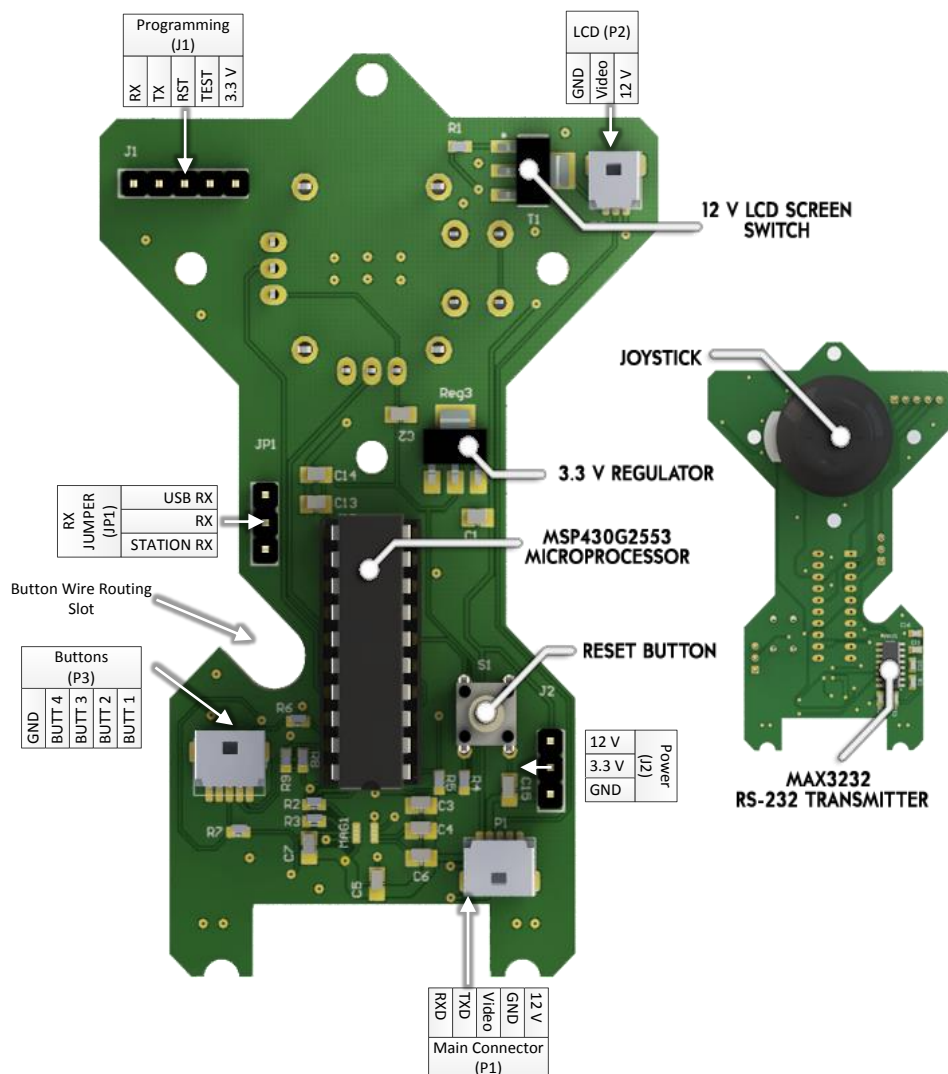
Render of OCU Board: Top Side (left), Bottom Side (right)
